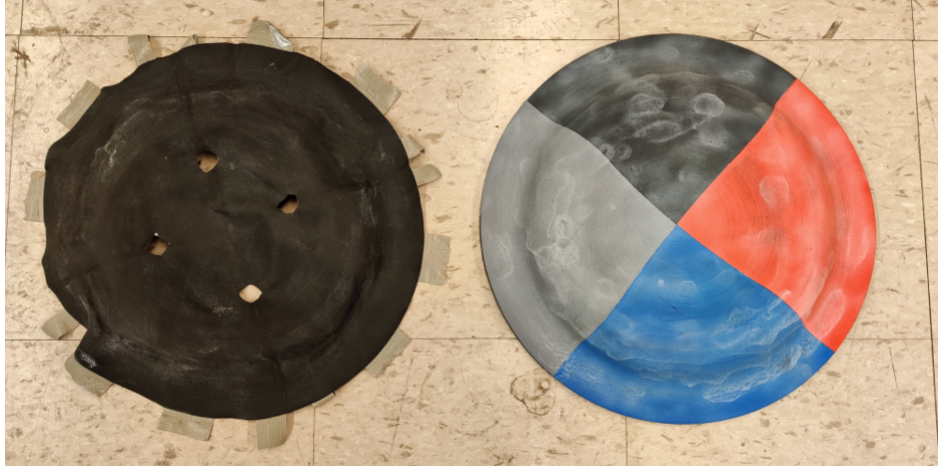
Air Bearing (left), Air Bearing Mold (right)
